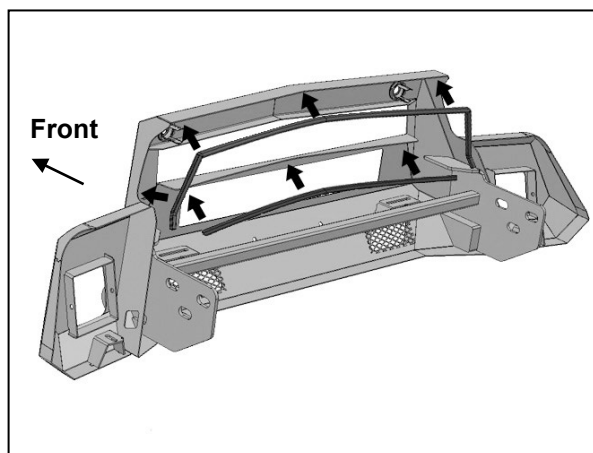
Remove lower bumper panel from the main upper bumper cover
